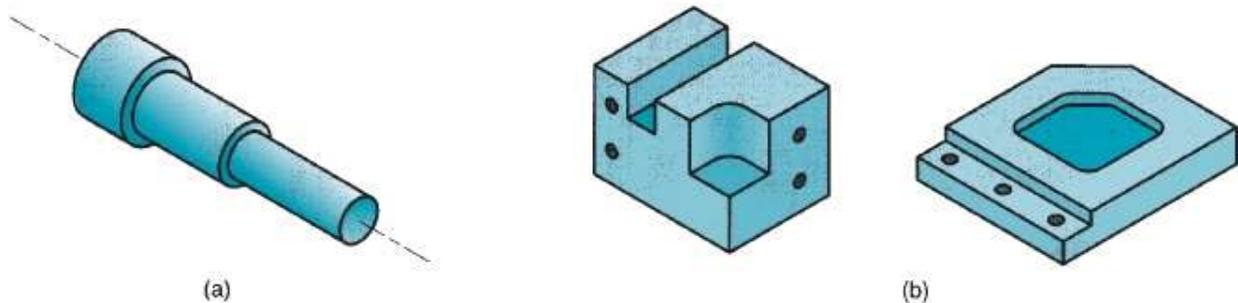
Machined parts are classified as (a) rotational, or (b) nonrotational, shown here by block and flat parts.
